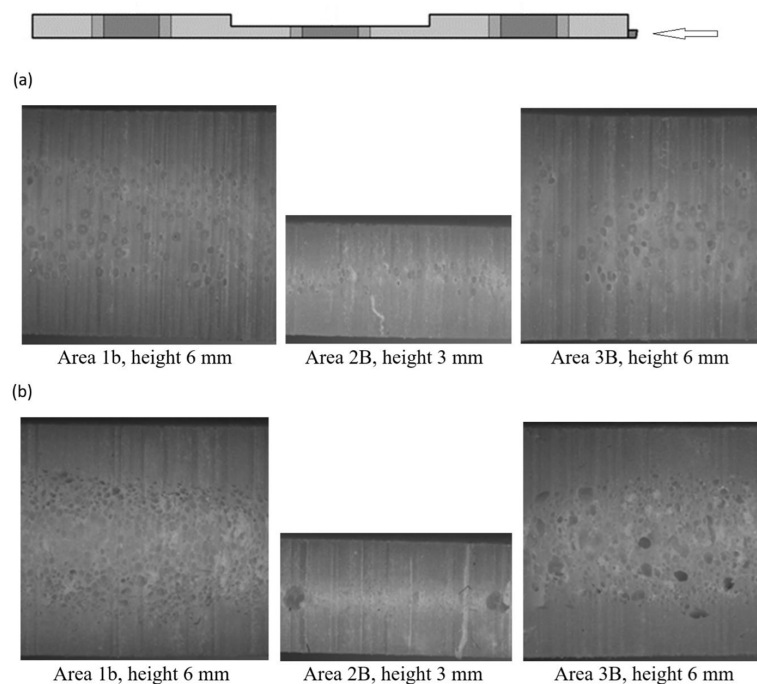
Structure of the PP T20 moulded parts with a 6 - 3 - 6 mm arrangement: (a) 1% blowing agent, (b) 2% blowing agent
